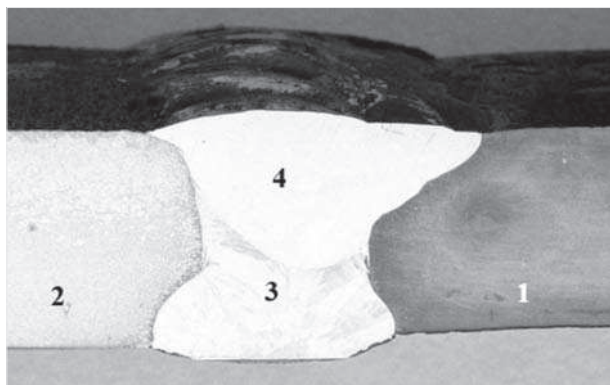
Macrostructure of welded joint: 1 – P91 steel, 2 – TP347HFG steel, 3 – root, 4 – face
